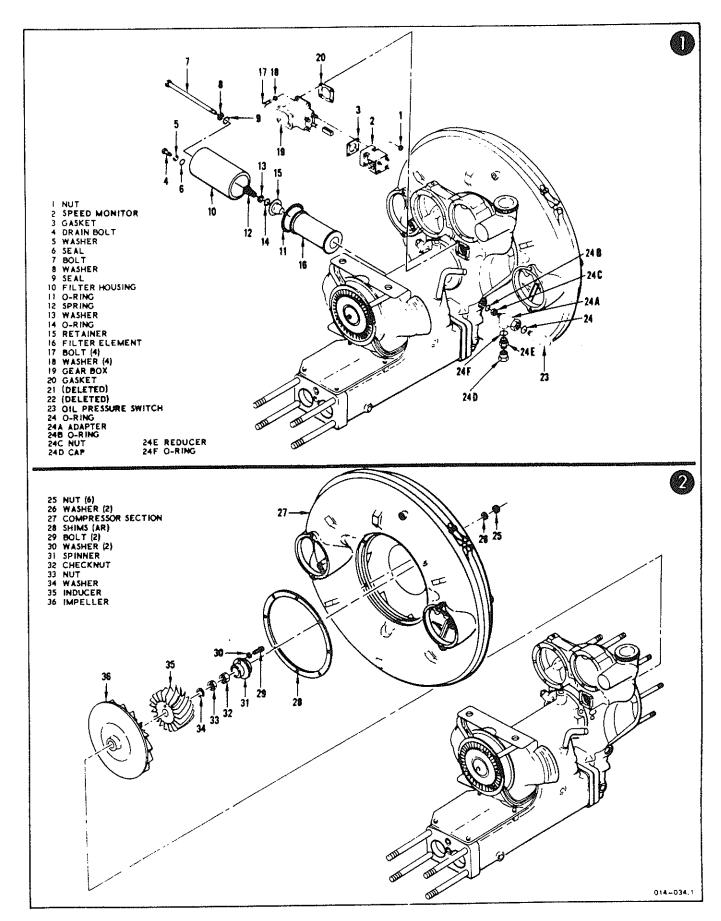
Gas Producer Section, Exploded View (Sheet 1 of 2)
